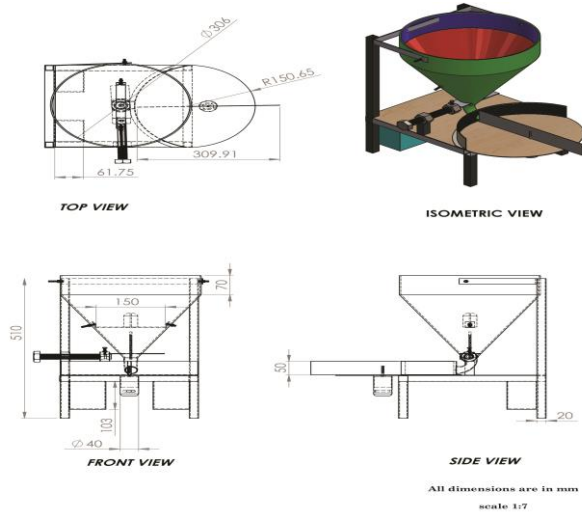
Fabricated seed cum fertilizer broadcasting machine
